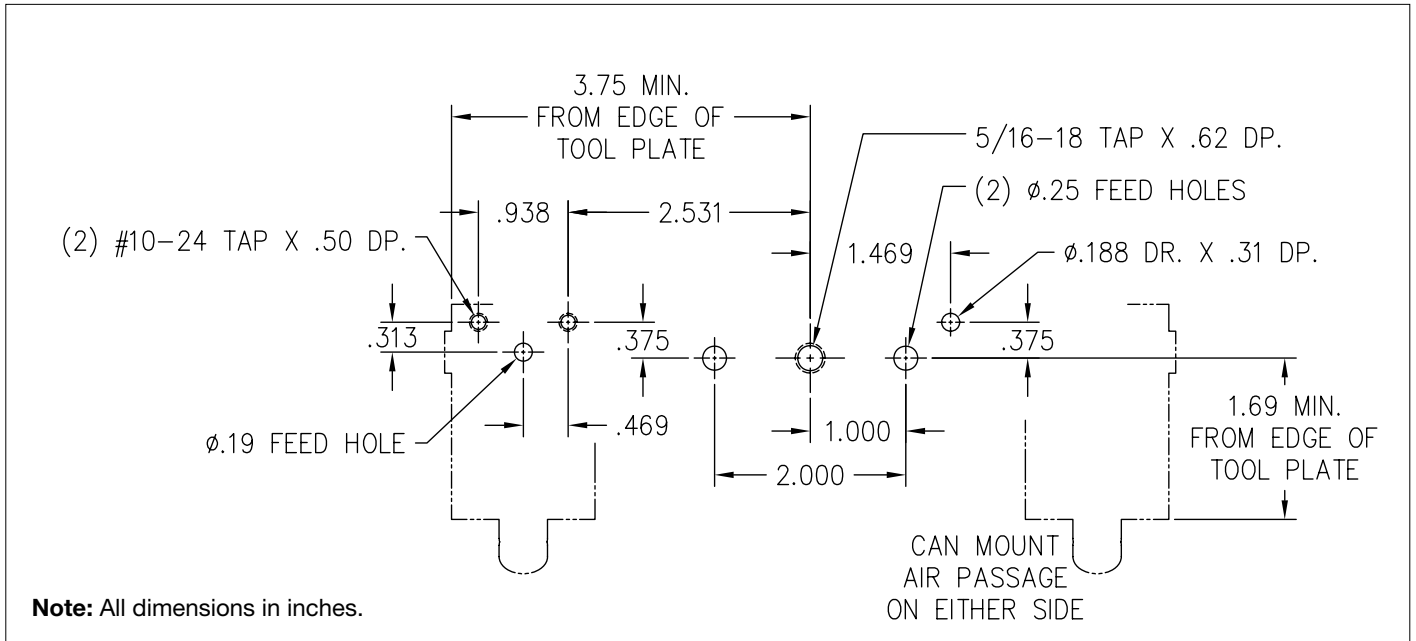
, Mounting Hole Pattern, MCR21 Receiver with MCRA11 Auxiliary Air Receiver and no Pilot Operated Check Valve
